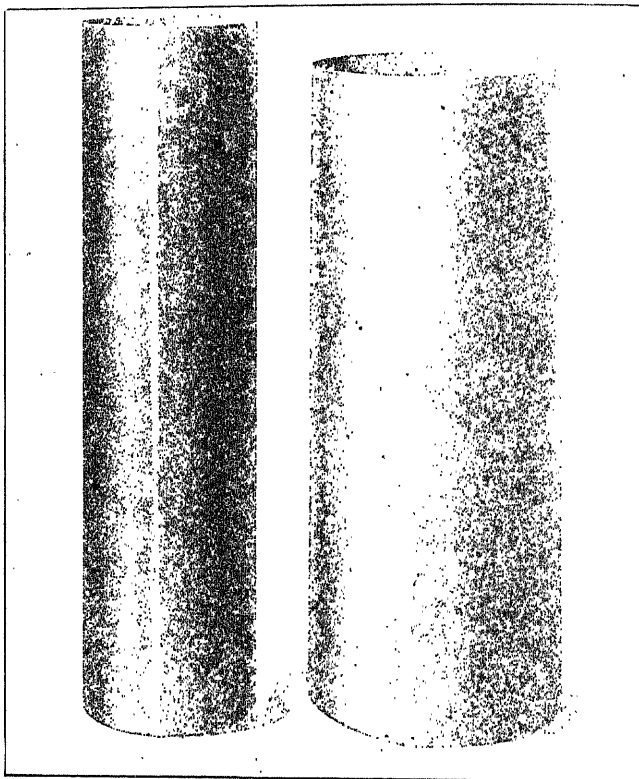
Seam Welded Automobile Muffler Tubes.
